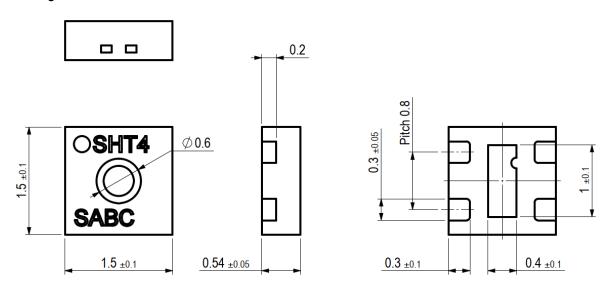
Dimensional drawing of SHT4x including package tolerances (units mm).
